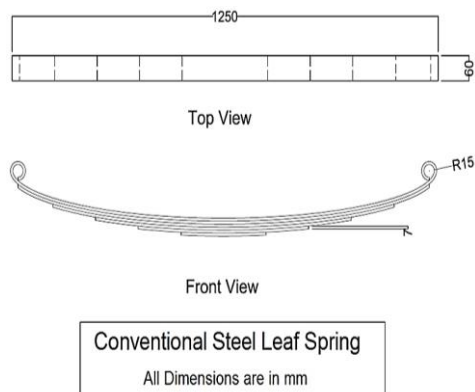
Drawing of Steel leaf spring in Auto-CAD
